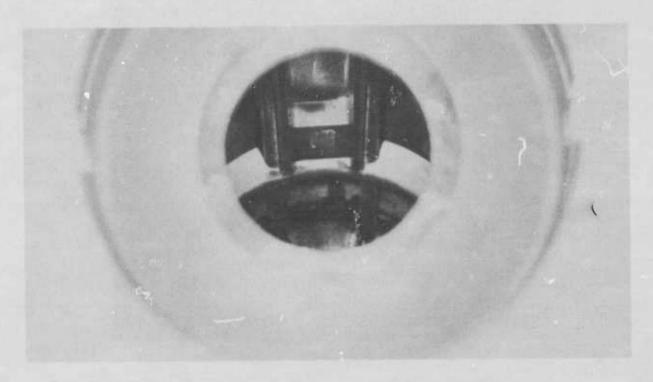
Fuel Tank Showing Internal Sway Brace Ring and Longeron.
